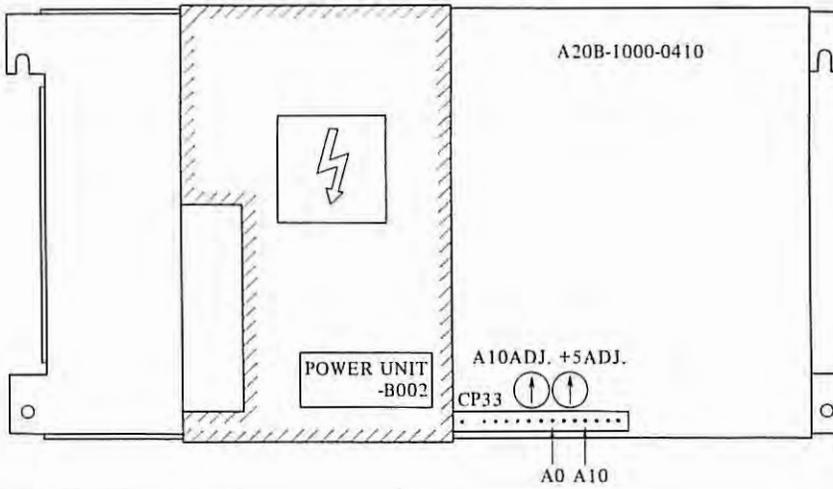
Set Points of Master PCB (A16B-1000-0010)
